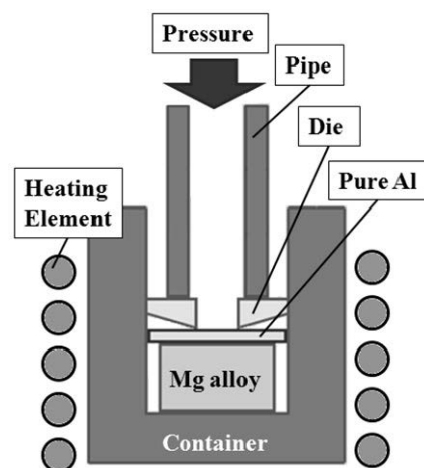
Schematic drawing of equipment and samples for hot extrusion.
